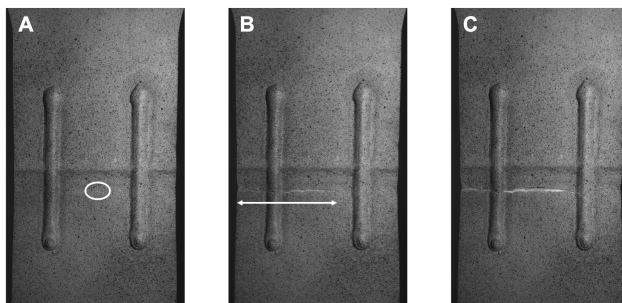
Fracture of specimen with cross weld speed 18 mm/s, without PWHT.
